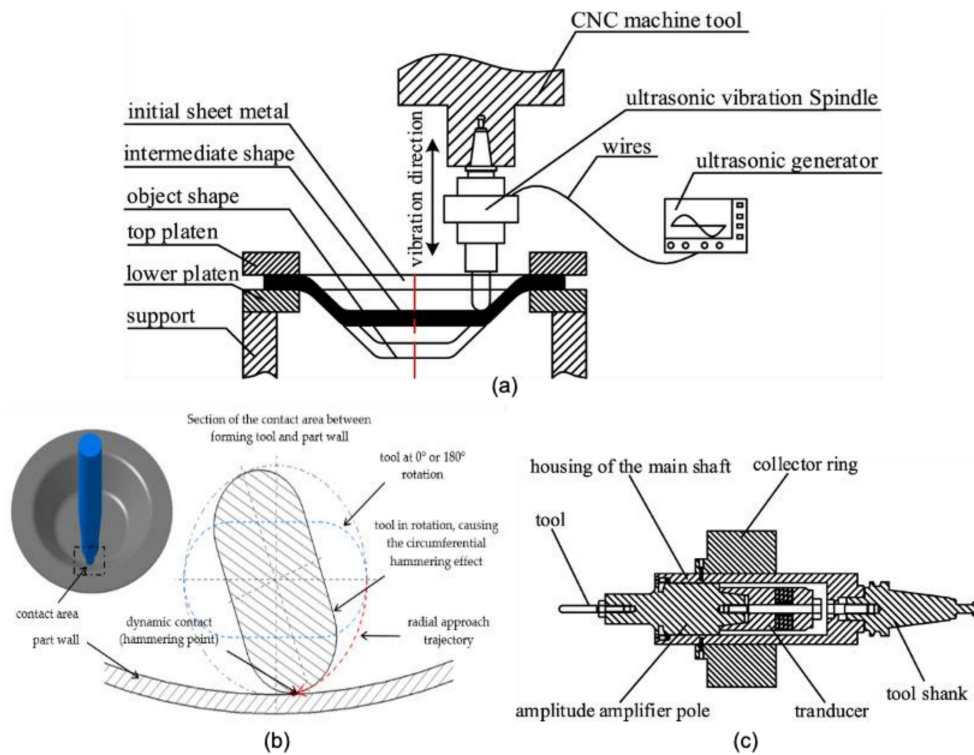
(a) CNC-based ISF machine with a vibrating tool, (b) ISF with circumferential hammering tool [32], and (c) Ultrasonic vibration assisted tool [38].
